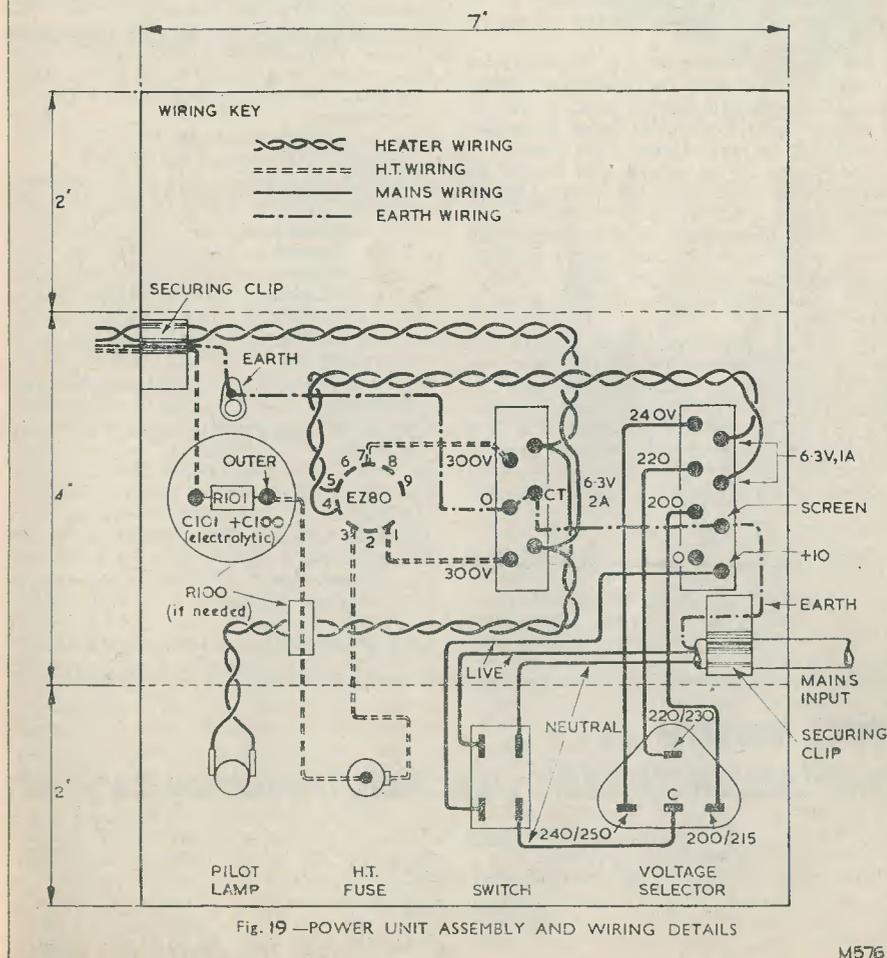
POWER UNIT ASSEMBLY AND WIRING DETAILS
